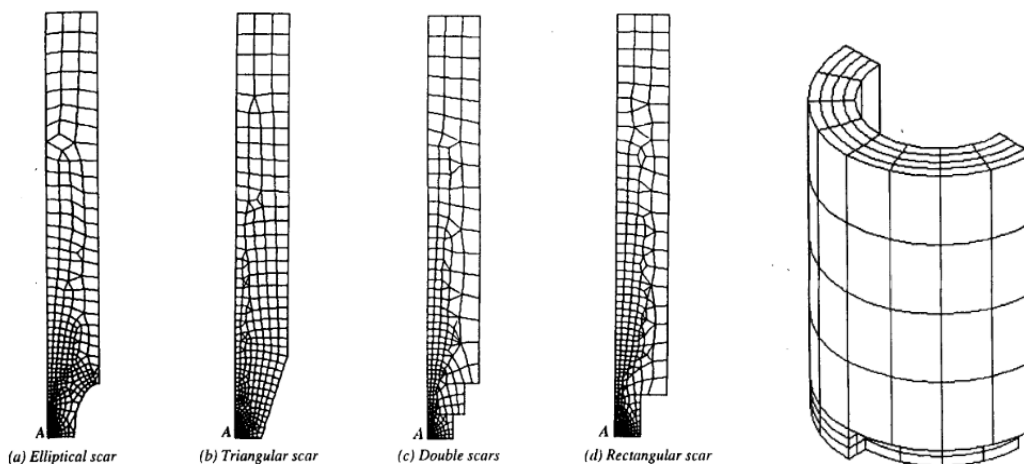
(a) Various modelled flaw shapes on boiler tubes [21] and (b) Part-through rectangular modelled flawed tube [21,81].
